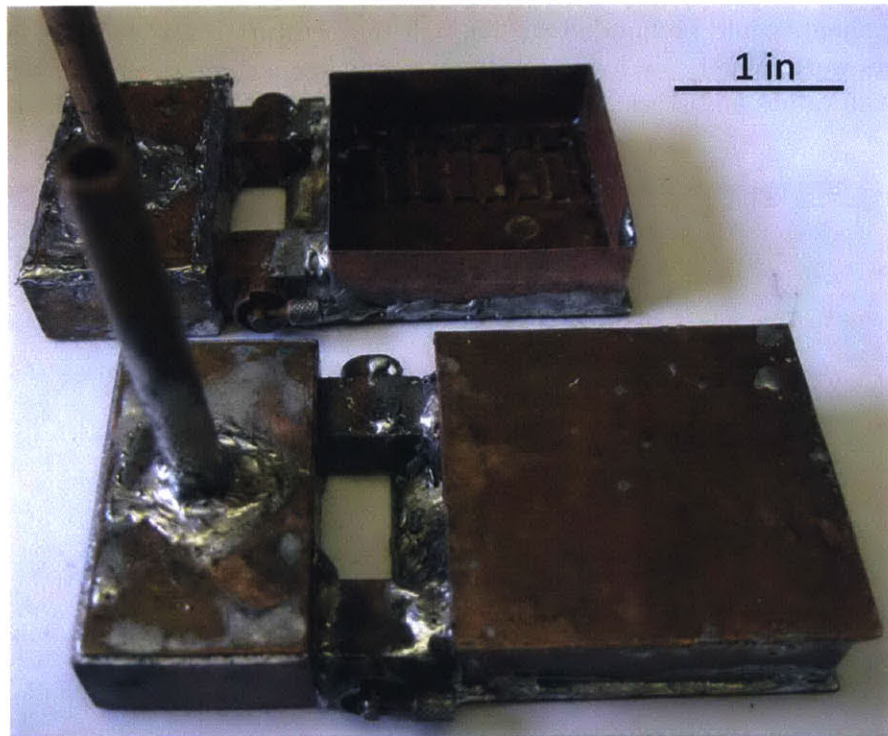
Image of the two Button Cell Prototypes that were made using the final design and fully soldered joints. The prototype in back of the image has the lid to the adsorbent side removed and does not contain the evaporator or adsorbent elements. Those elements were bonded using high thermal conductivity epoxy, and the lid was soldered on later by placing the whole system back on the soldering setup.
